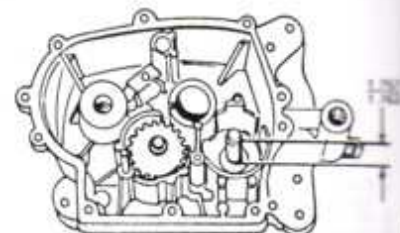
On Models HH80, VM80, HH100 and VM100, balancer gear shafts must be pressed into cover or engine base so a distance of 1.757-1.763 inches (44.628-44.780 mm) exists between shaft bore boss and edge of step cut as shown.
